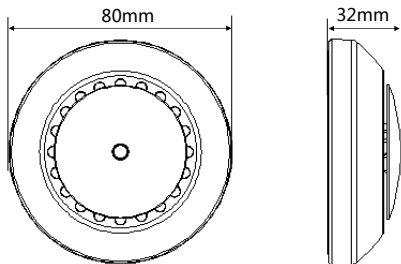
Dimensions - Front View Figure 3. Dimensions - Side View
